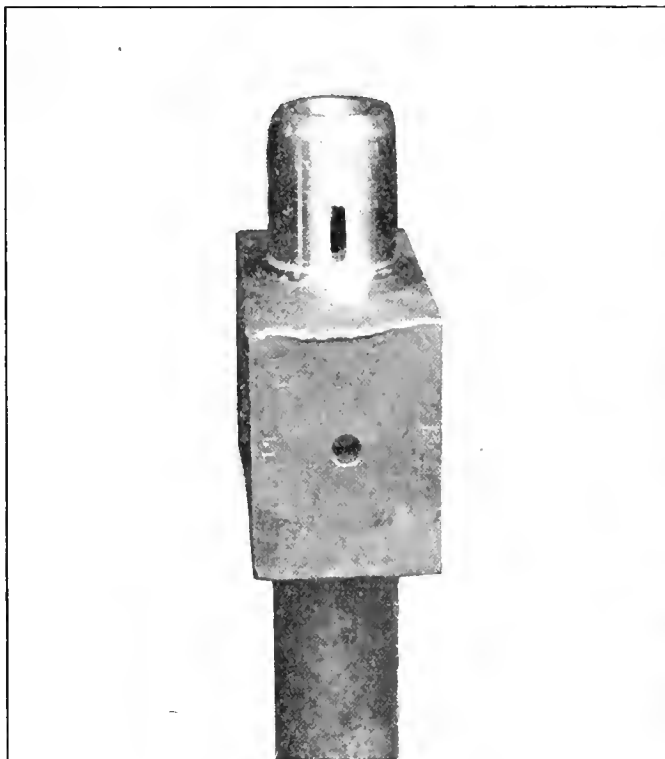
Welded Valve Rod Guide Ready for Service.
